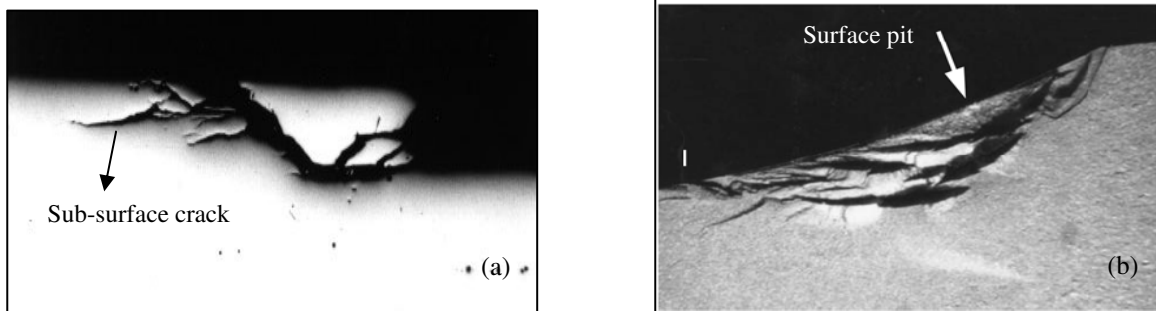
(a) A bearing sub-surface crack [14], (b) A bearing surface pit [15]
